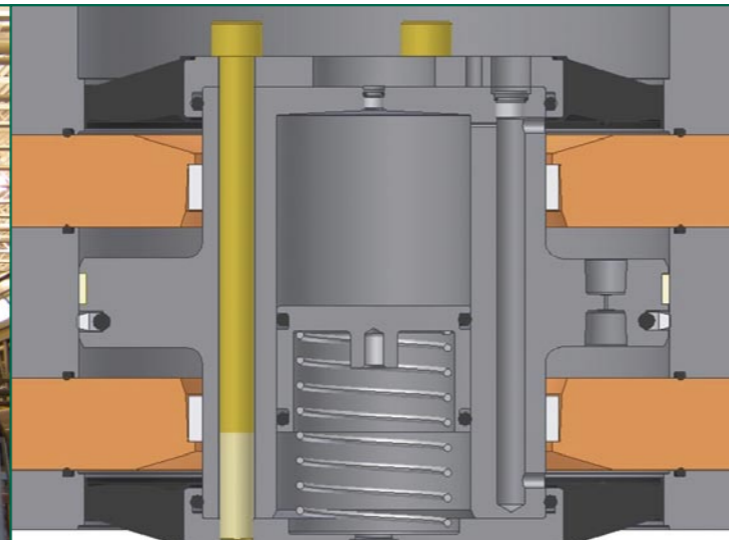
The basic damper layout with elastomer sections, internal accumulator and fluid chambers visible
